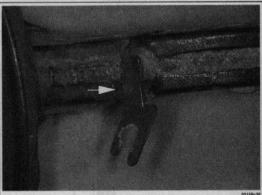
and the brake hose retaining clip to the new knuckle
